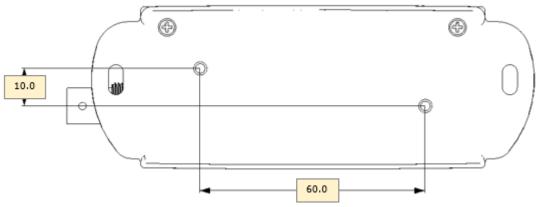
LDSBus ORP Sensor Adapter Dimension – Bottom View
